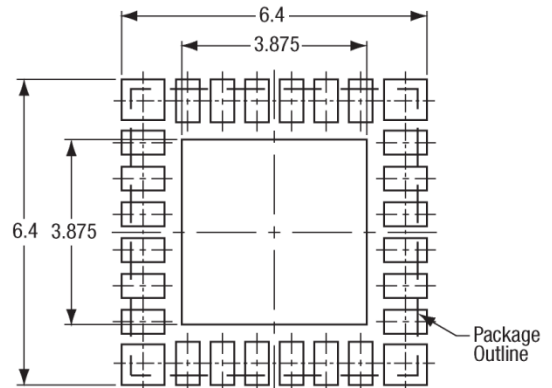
Dimensional Drawing for 6 mm x 6 mm x 0.9 mm, 28-Pad Package – SKY77589-11 Specific (All Views)
